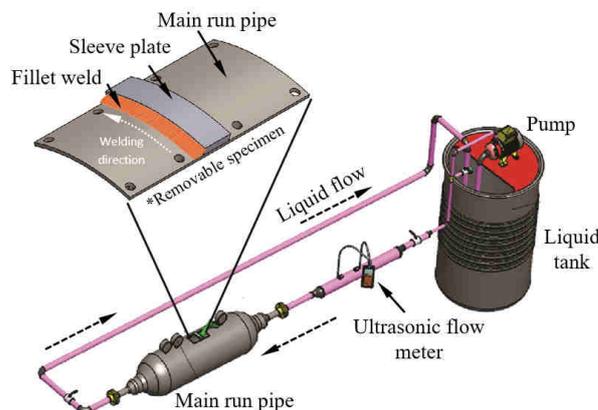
Schematic of PRCI-Thermal analysis during welding
